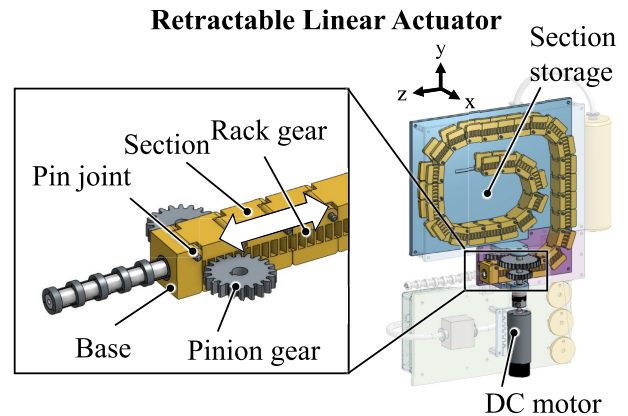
Schematic of the retractable linear actuator. The sections move linearly by the rack-and-pinion gear train, and the backward sections are retracted in the section storage.
